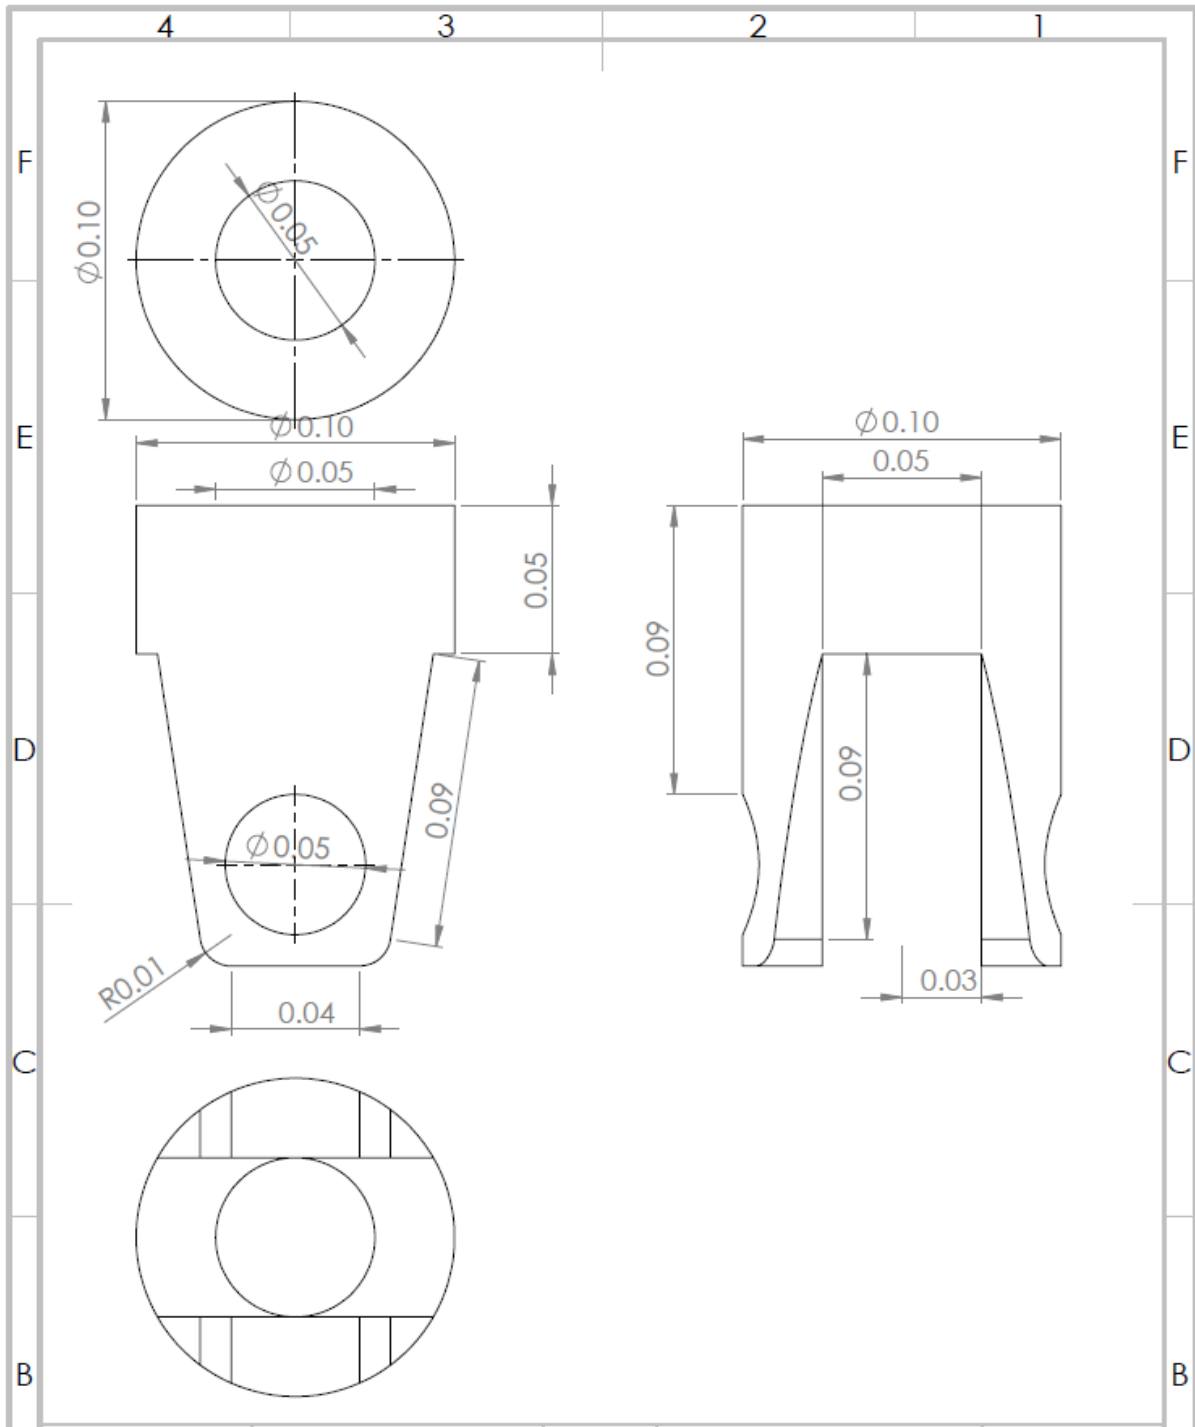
Dimension of Universal Joint (Upper Yoke)
